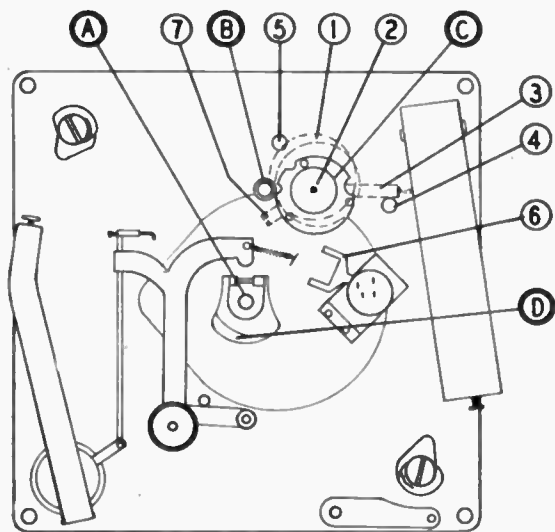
Points of lubrication and adjustment on motor-turntable assembly. Pickup at left, cutter at right.
